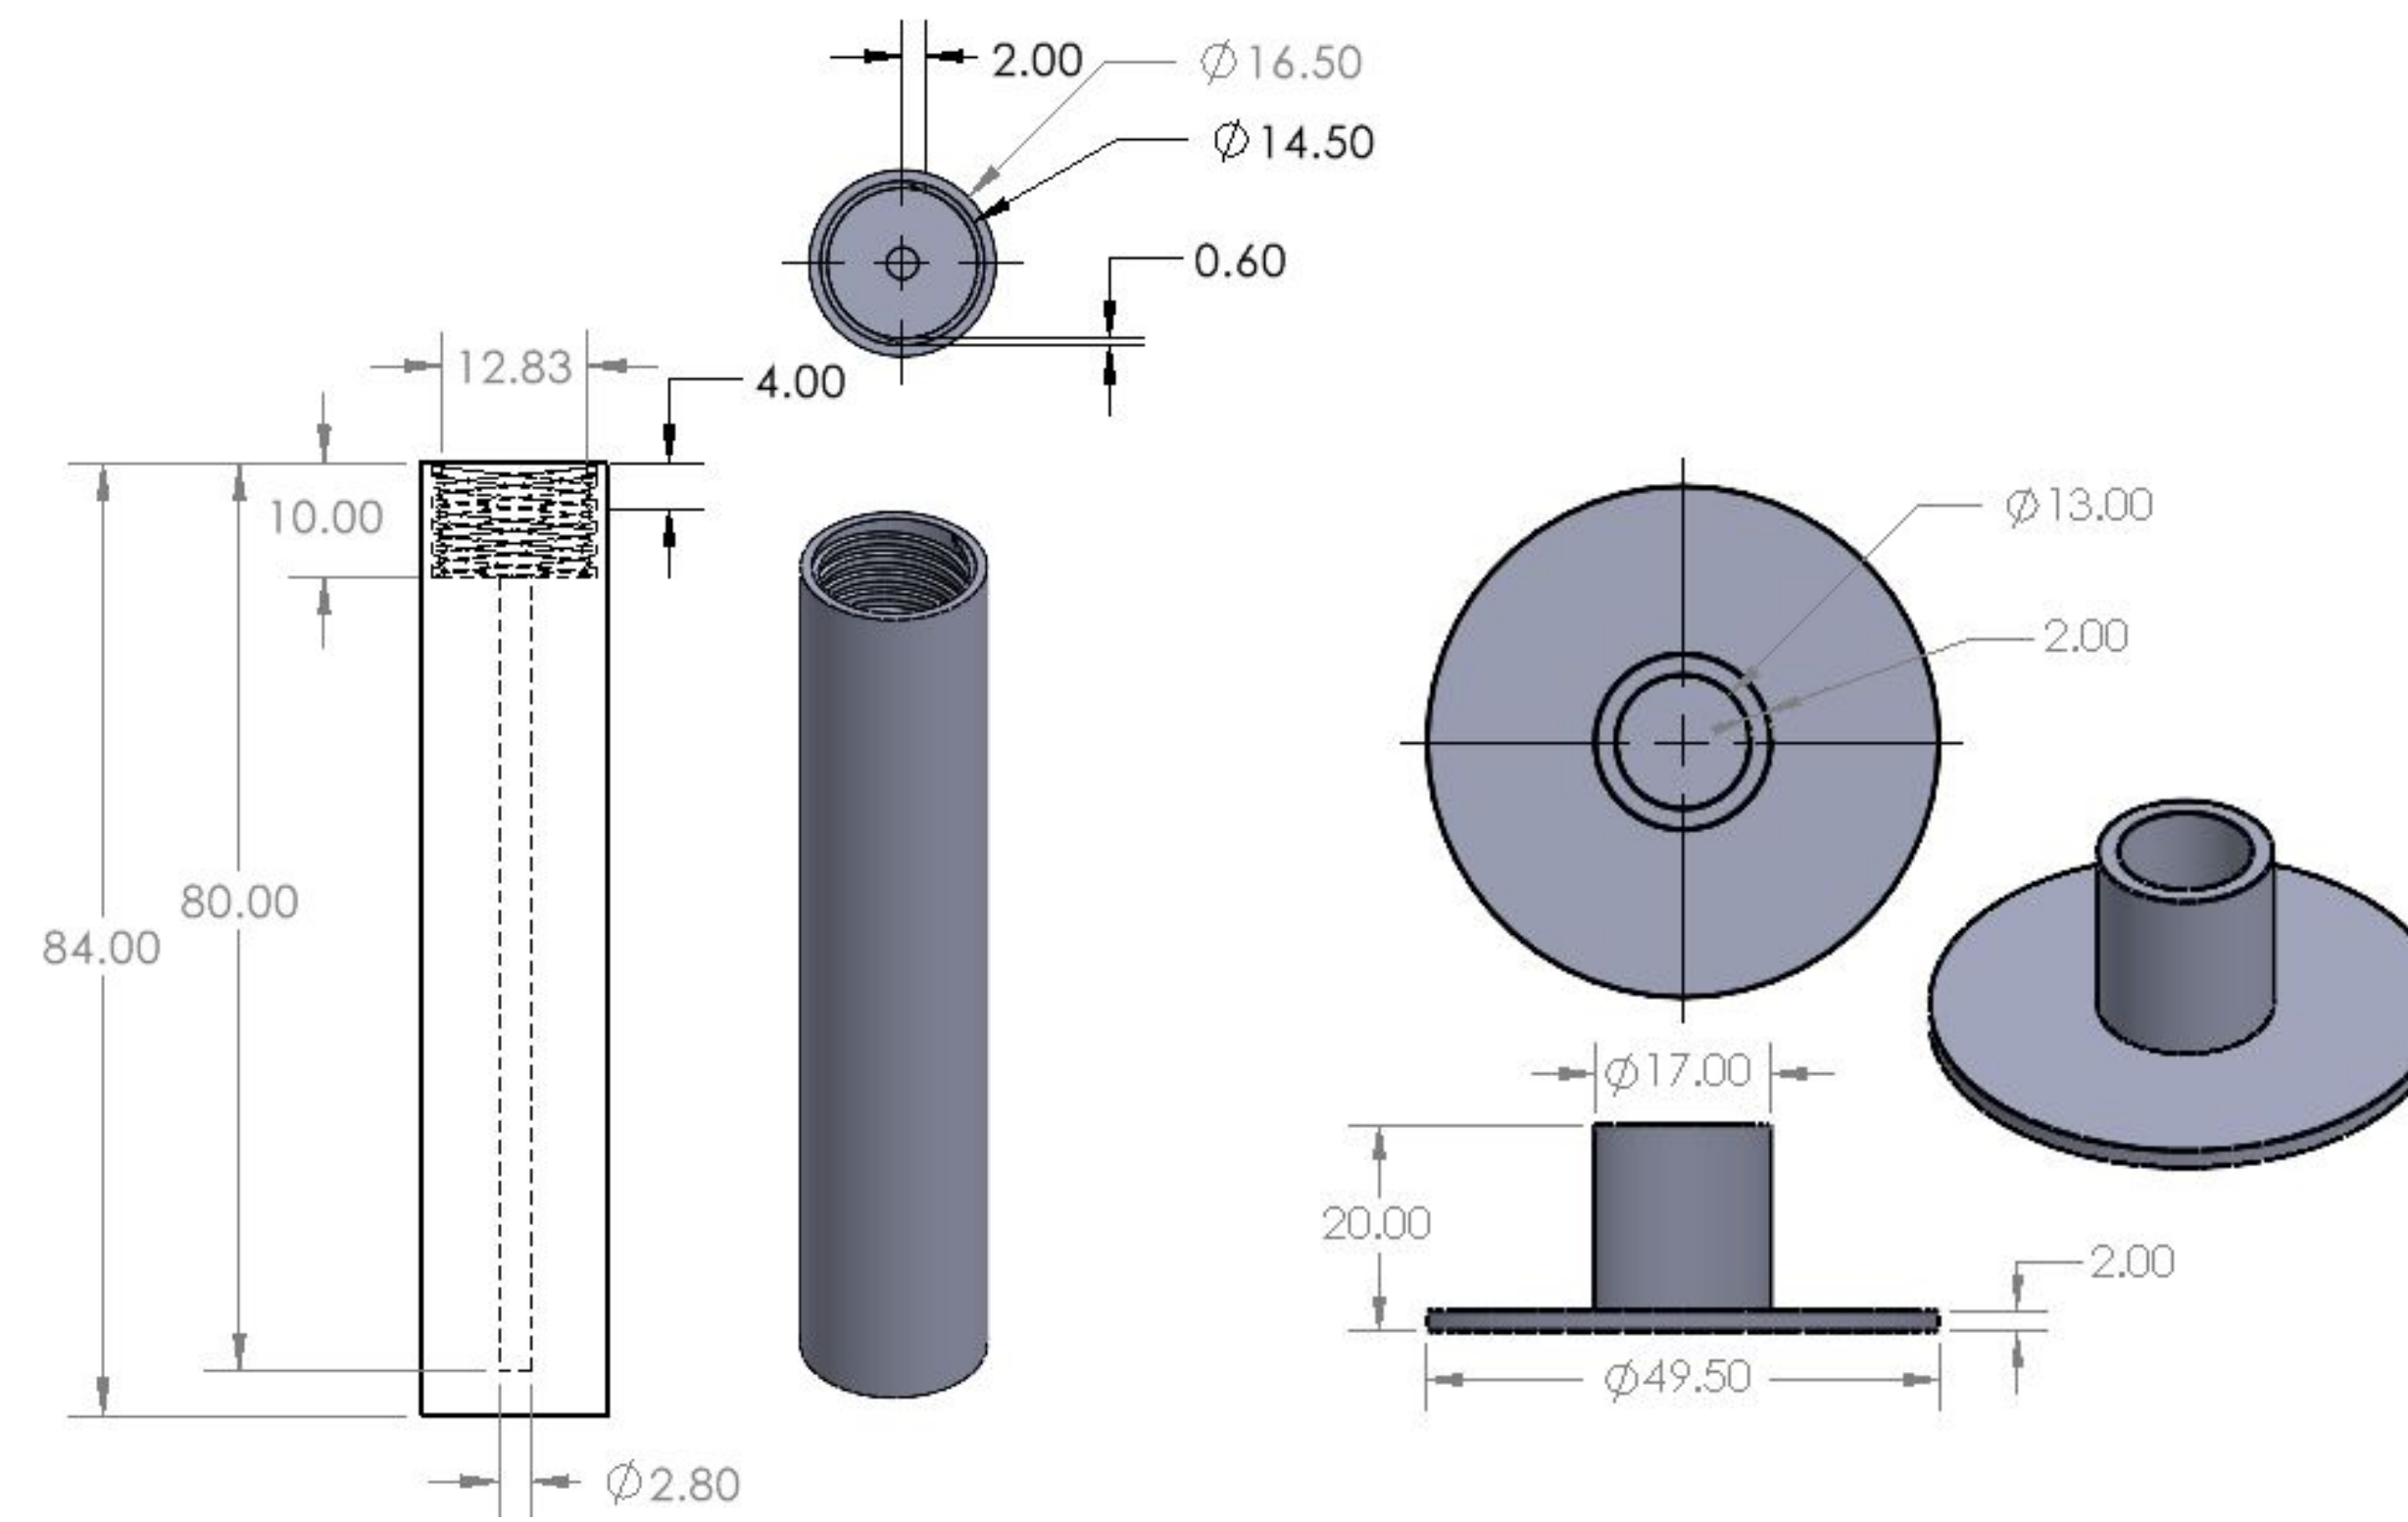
Dimensioned (mm) Solidworks model of final prototypes. (Left to right: Tilt and Break, Swab Holder)
